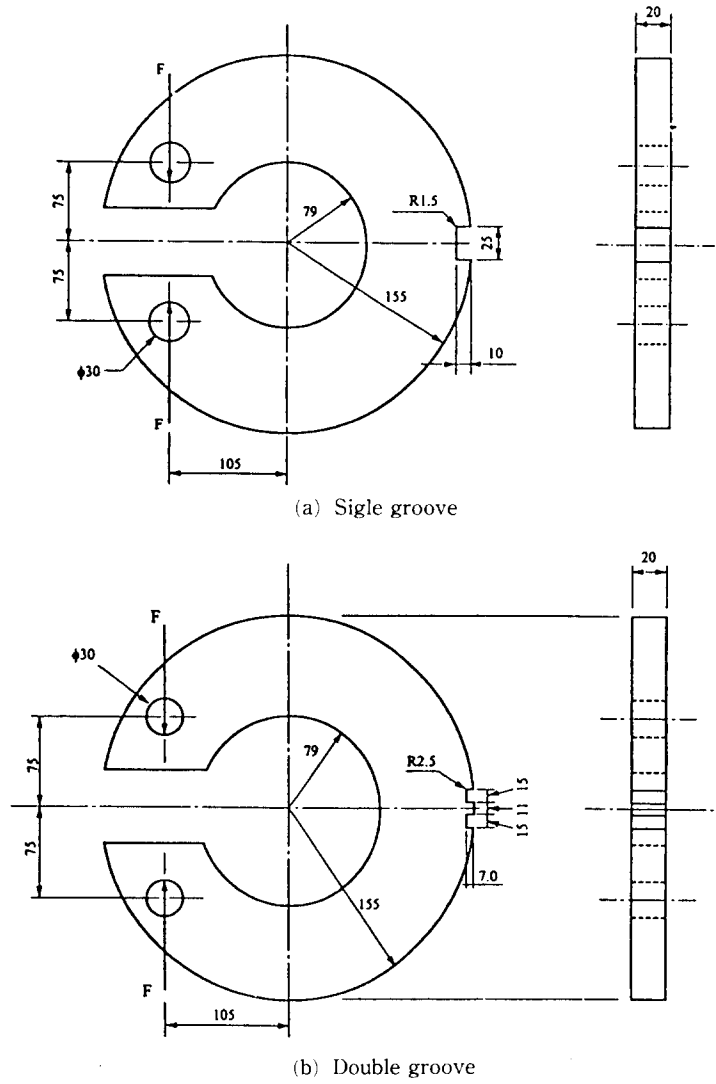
Geometries of C-shaped fatigue test specimens with external grooves
